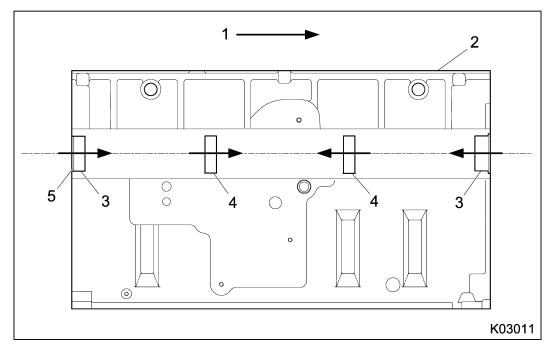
Camshaft bushing installation pull direction (partial crankcase cut-away)
